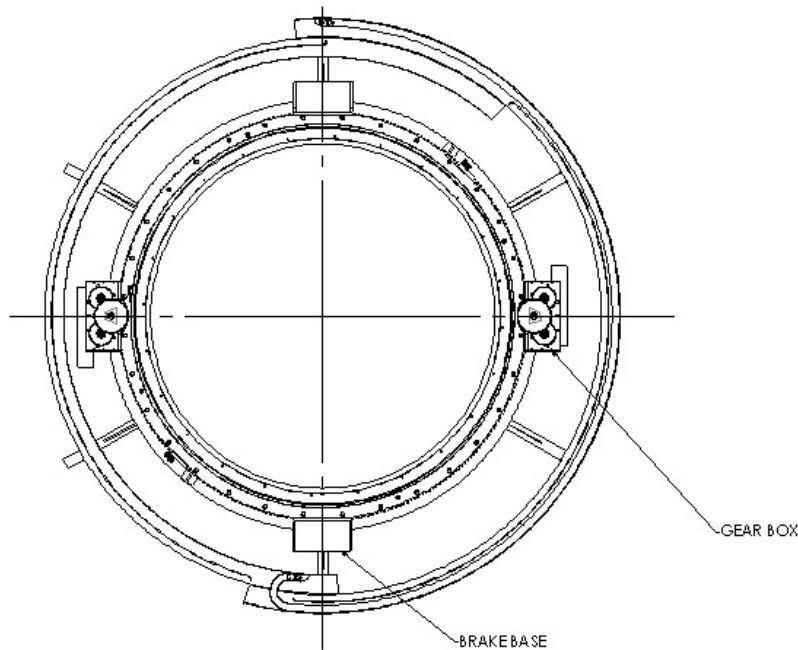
Cassegrain rotator with mechanical interface [R.16]
